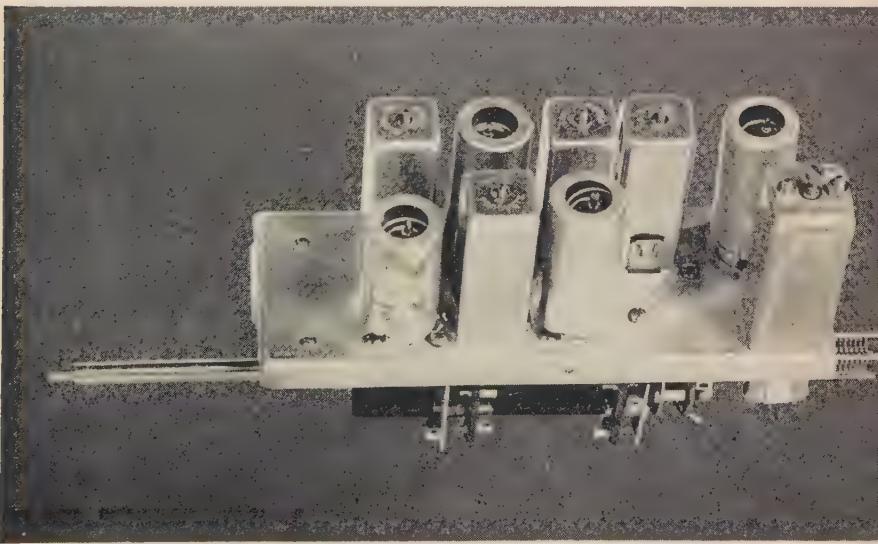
Bottom view of the i-f chassis before wiring. The crystal filter unit and shield is shown in the upper right corner.
